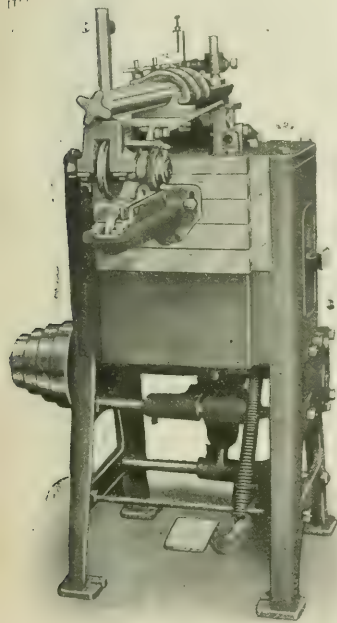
A NEW SEAM-WELDING MACHINE.
